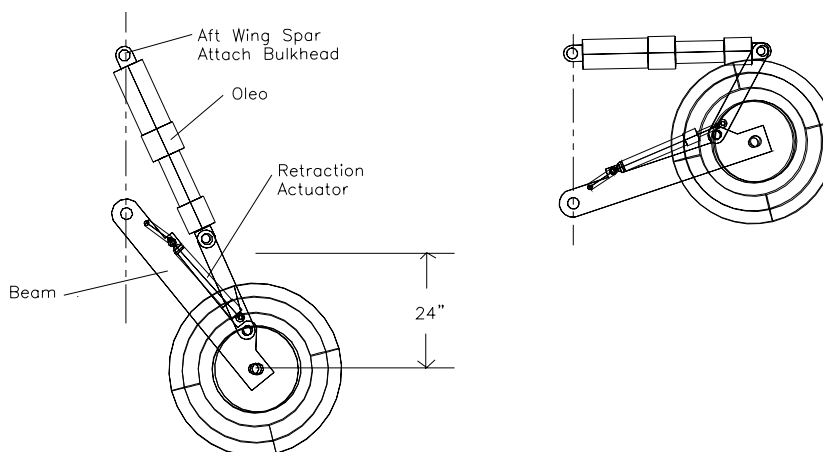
Main Landing Gear Extended and Retracted Geometry
